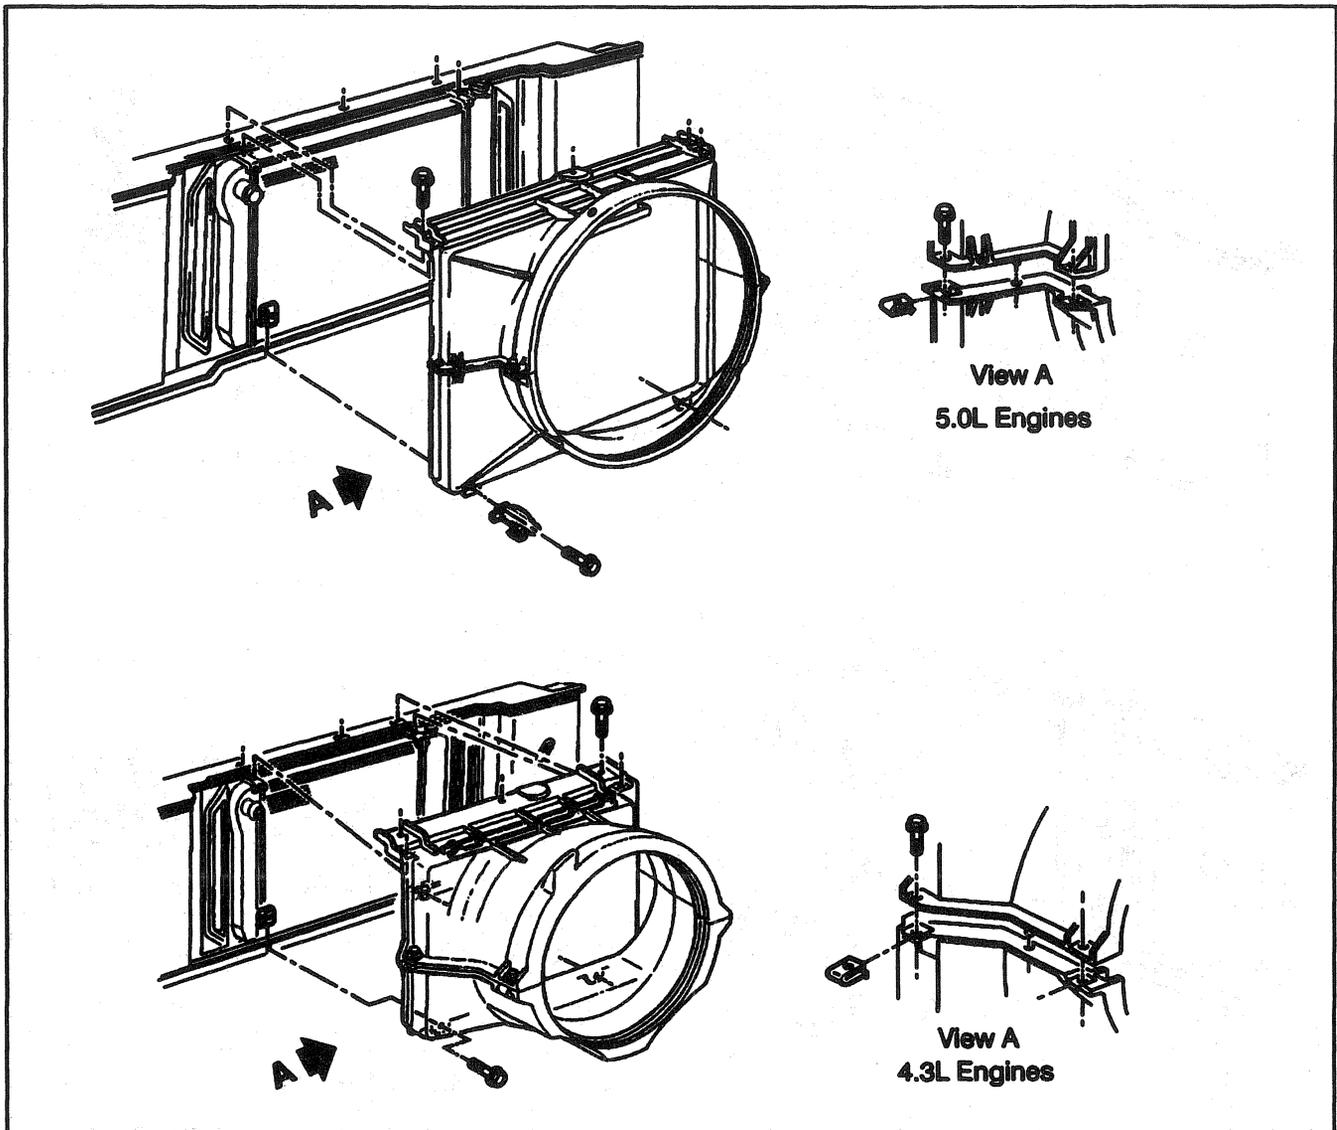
Fan Shroud and Components (4.3L and 5.0L Engines)
